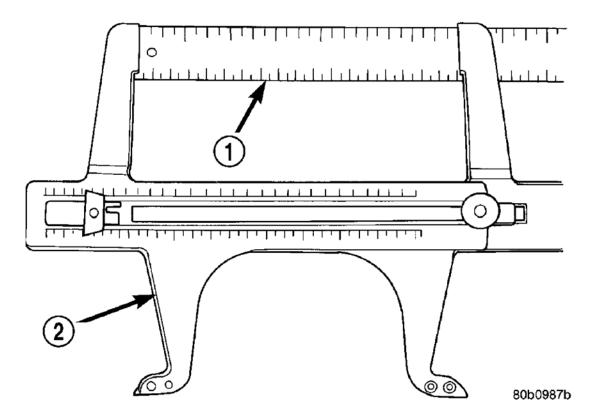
Setting Gauge To Park Brake Shoe Measurement Courtesy of CHRYSLER LLC
